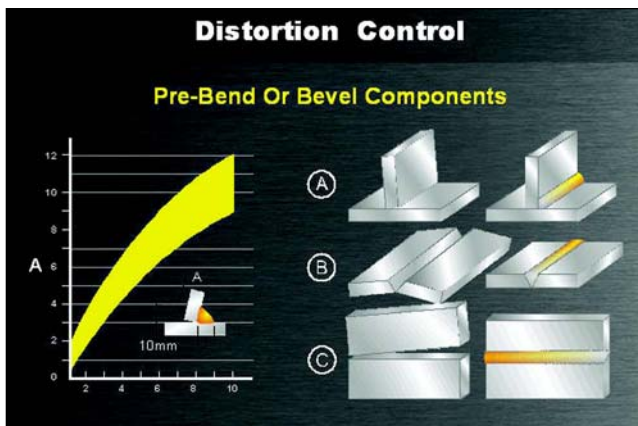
Pre-Bend or Bevel Technique Uses the Weld Shrinkage to Move the Component Into the Desired Position After Welding
